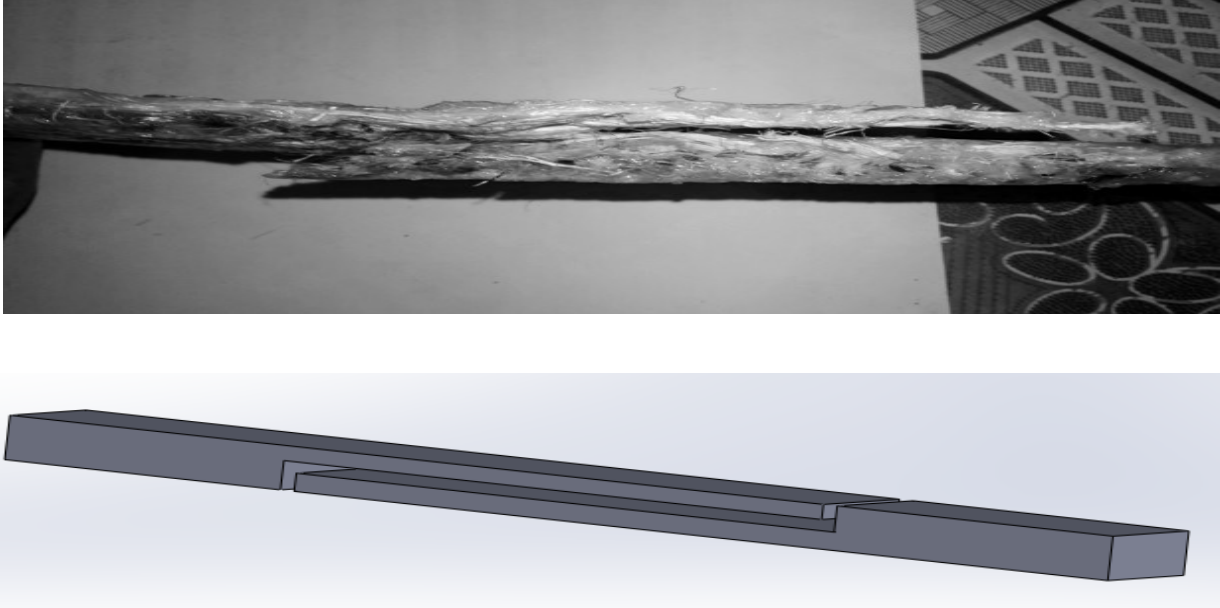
a) Fracture behavior of MMM with EWE HFCM and b) Schematic view of failure
